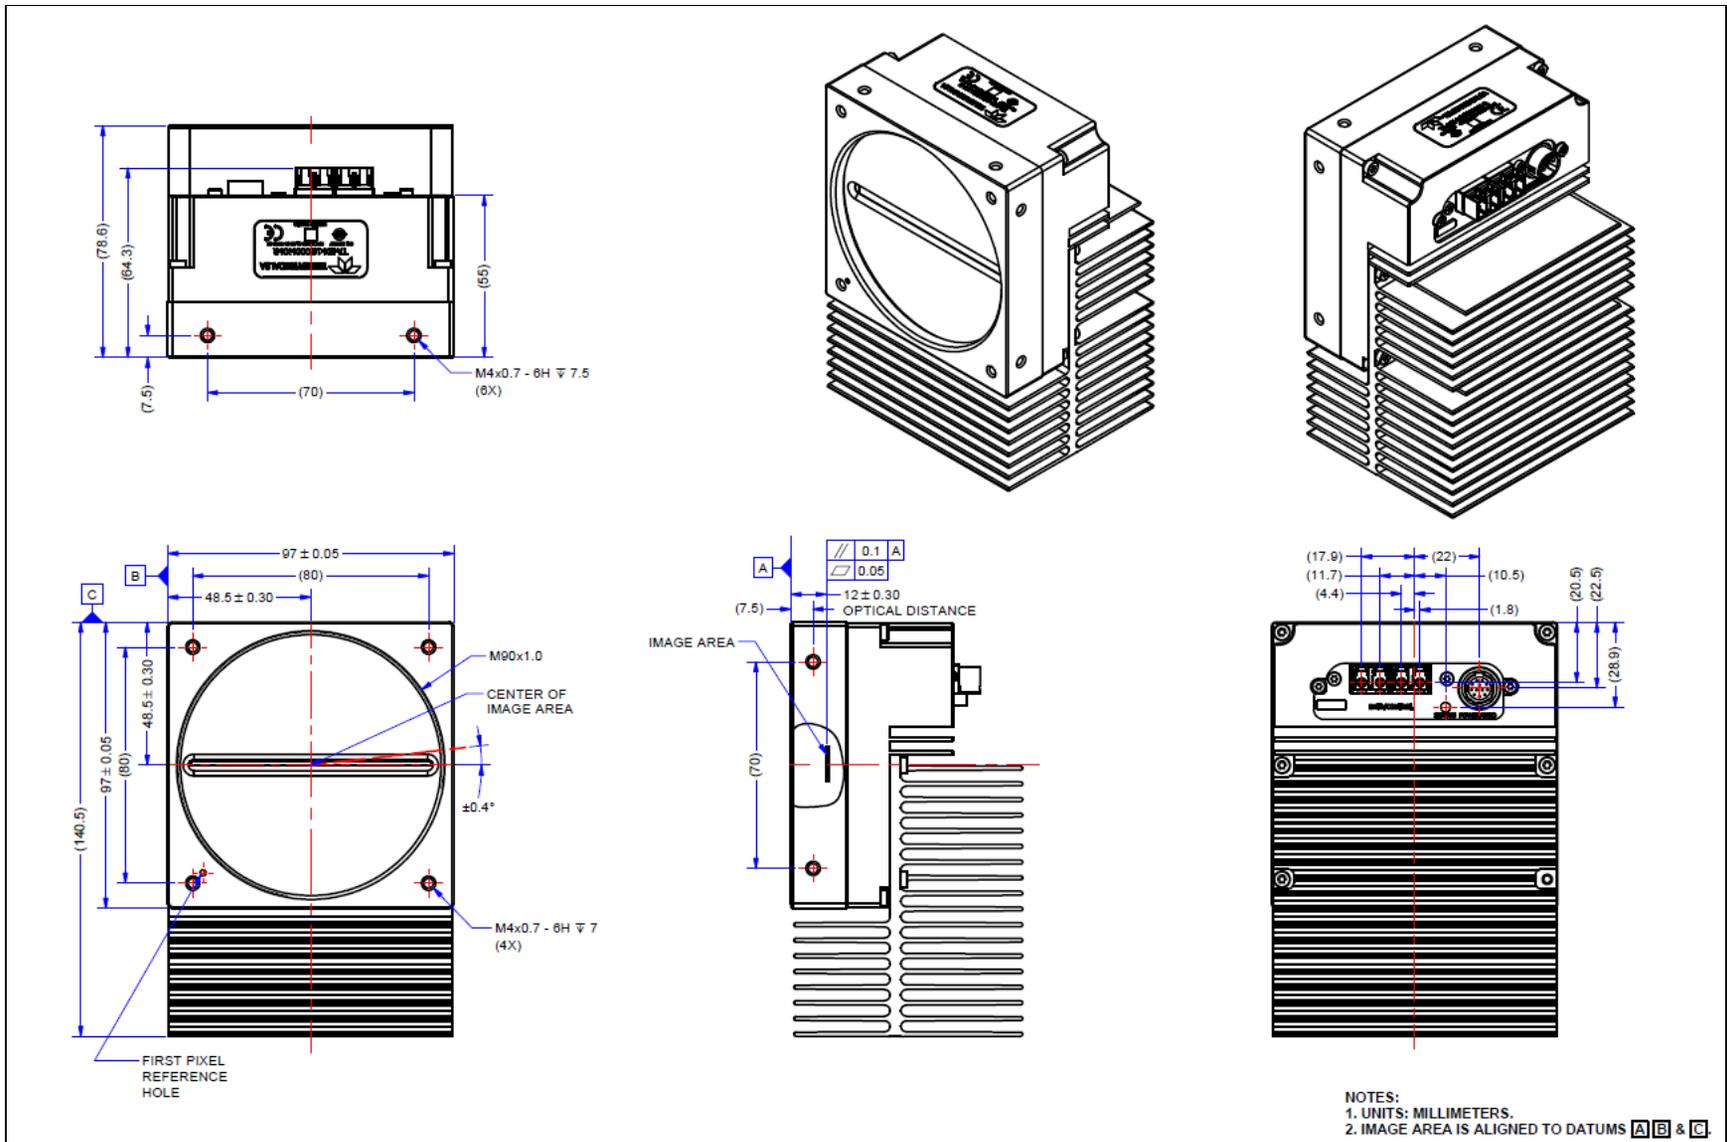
HL-FM-13K18H-00-R and HL-FM-16K15A-00-R Mechanical Drawing
